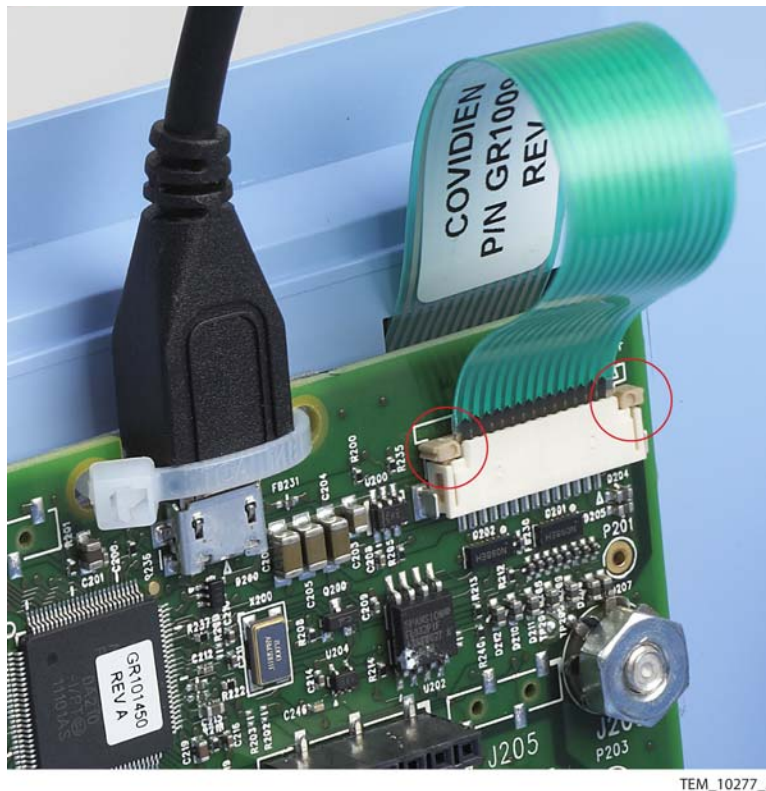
Attaching Backing Plate and Cable Tie to UI PCBA
